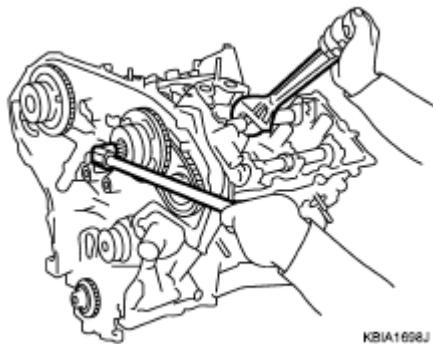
Removing Camshaft Sprocket (INT And EXH) Mounting Bolts
